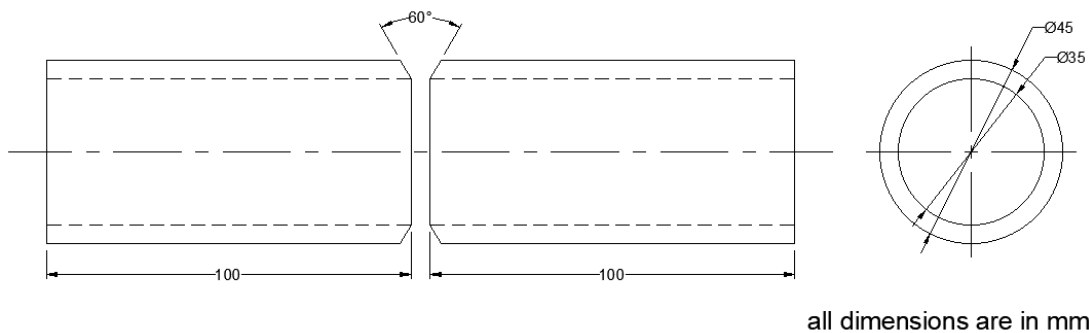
2.25 Cr-1 Mo steel pipe two-dimensional view
